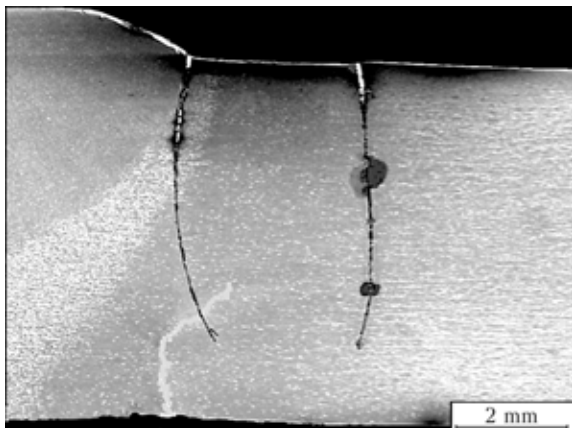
Macrosection of the welded joint with cracks after testing
